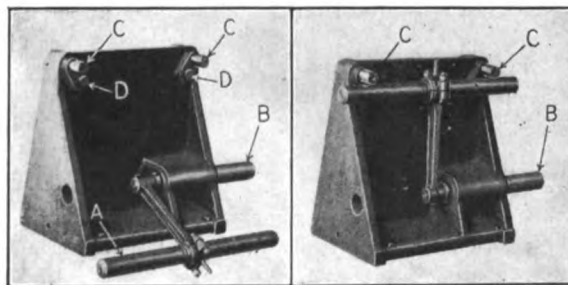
CONNECTING-ROD TESTING FIXTURE
